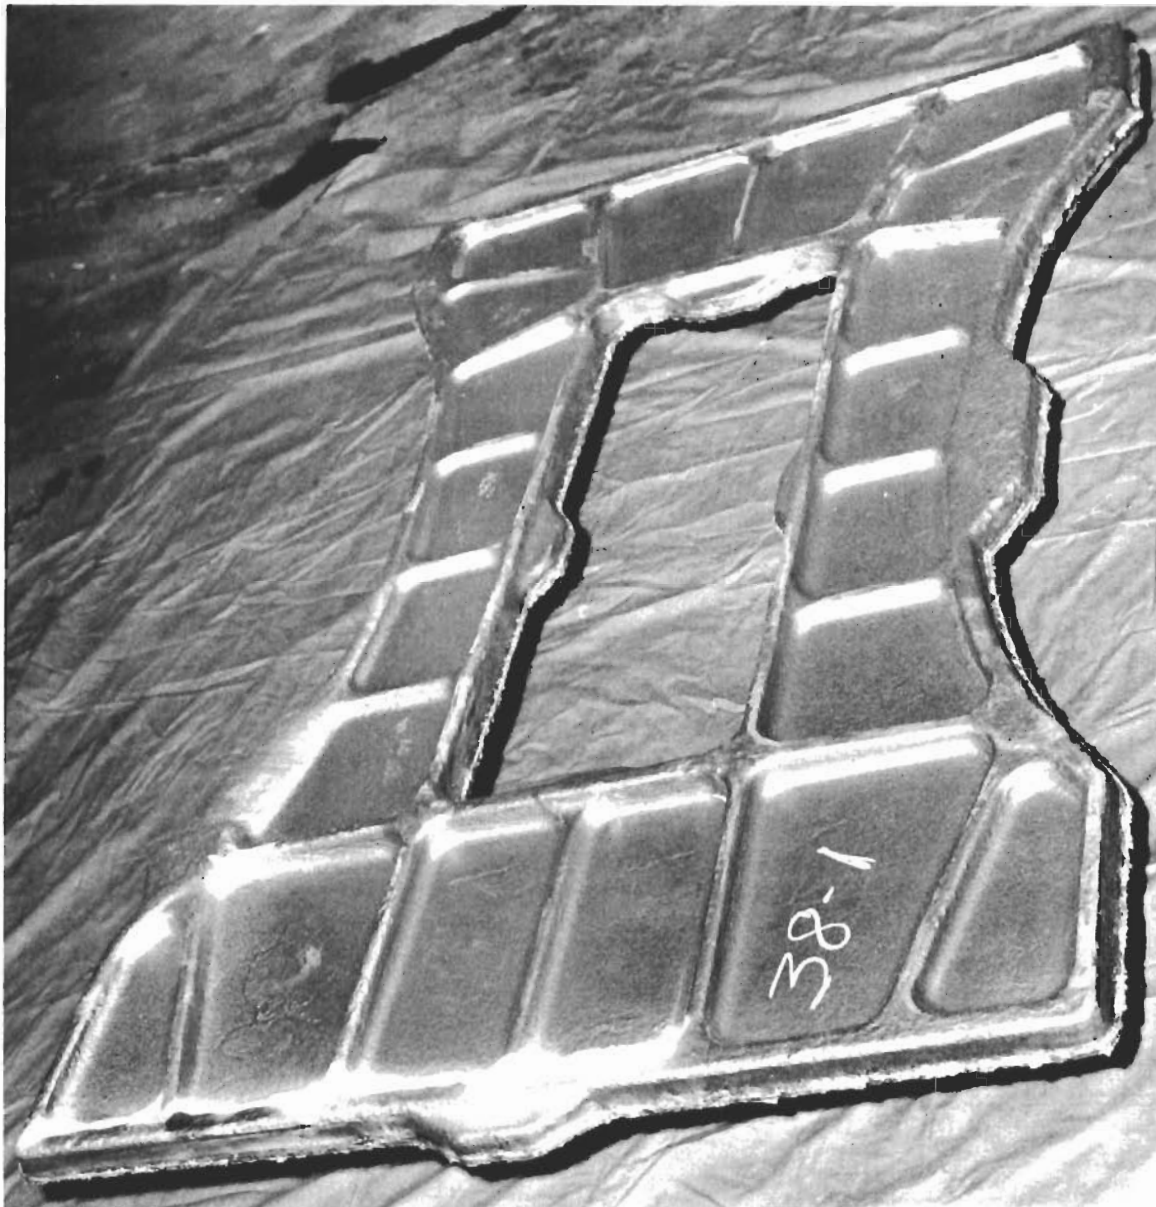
One of Three High Strength Steel (D6ac) Bulkhead Forgings Produced During Initial Die Try-Outs with 50,000 Ton Hydraulic Press. Surface Shown Represents Lower Die Impression. Shown after Trimming (Torch Cut, but in this Case, not Ground Along Flashlines) and Abrasive Blasting.
